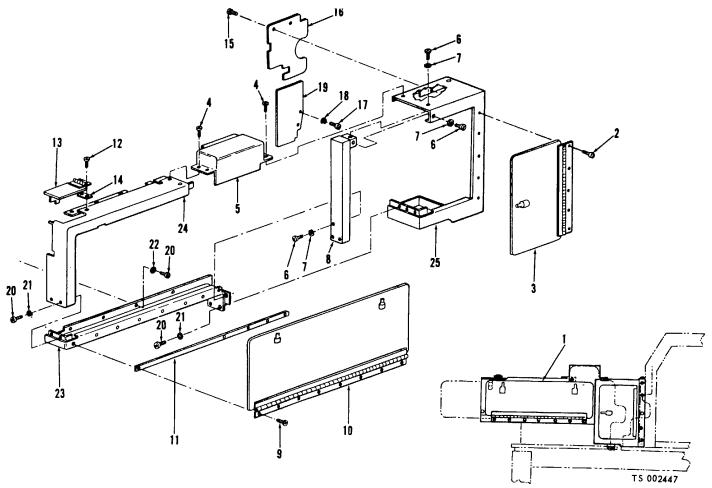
Delivery Unit Rear Guard Assembly, Exploded View 4-14
